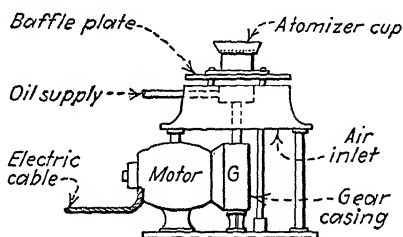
Vertical-shaft rotary atomizer (gear driven by horizontal-shaft motor).
